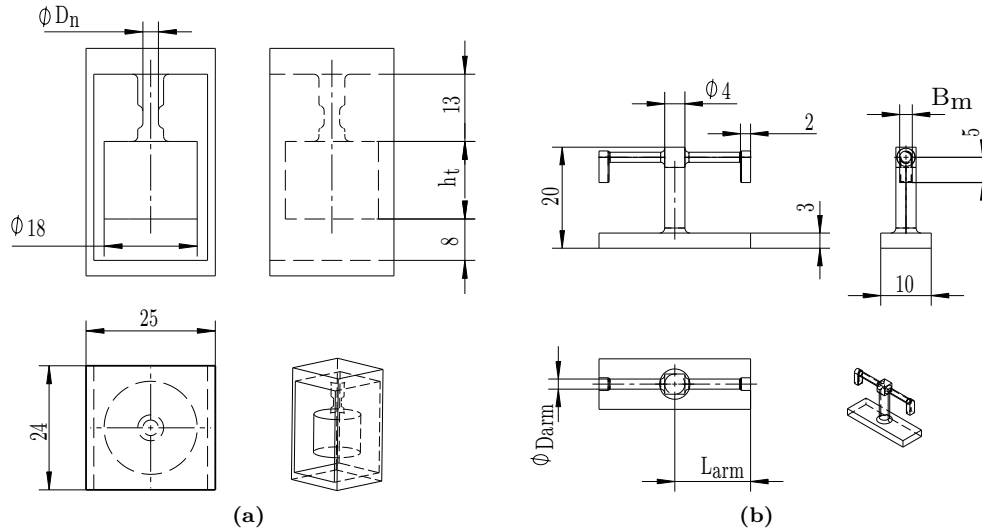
Technical drawing of (a): tensile specimen and (b): bending specimen. For each specimen, the provided isometric view is displayed at a scale that is half the size of the other three given views. All dimensions are given in mm.
